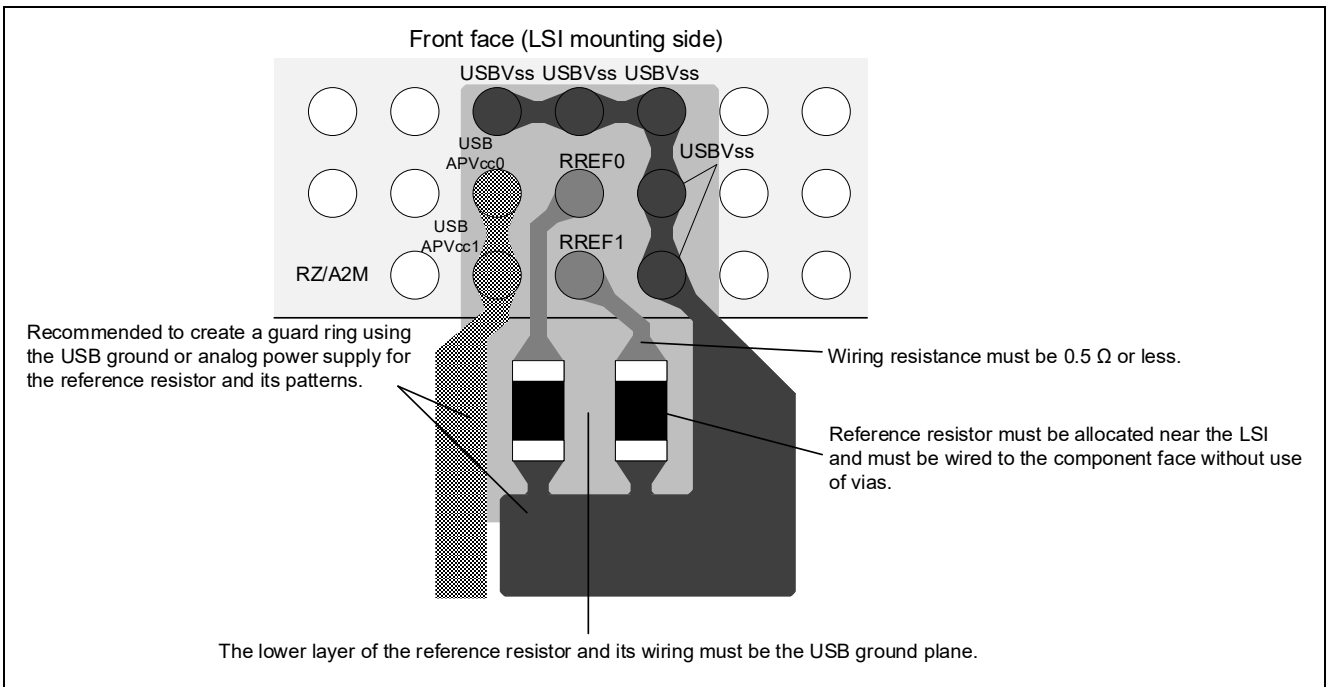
RREF pin vicinity pattern design example 4 (324 pin BGA package)
